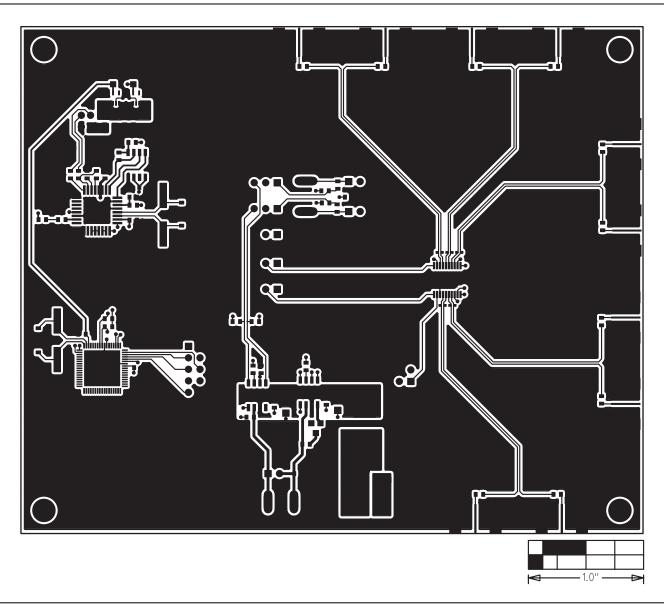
MAX9132 EV Kit PCB Layout—Component Side
